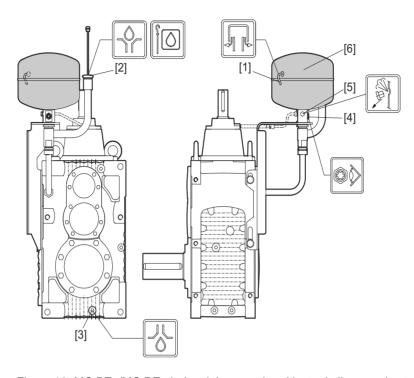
MC.PE../MC.RE.. industrial gear units with steel oil expansion tank
